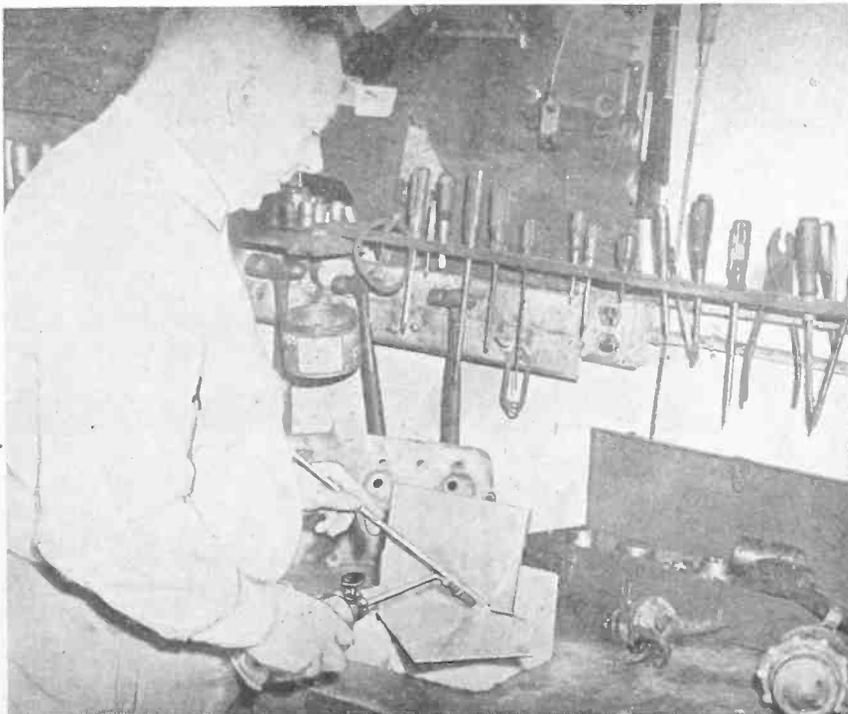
is an outstanding example of the use of Chemalloy to fabricate an aluminum wave guide transition out of four pieces of aluminum and flange. It has been even simpler to use Chemalloy to solder or weld two wave guide sections in position for fabricating a directional coupler. Such work has previously been unheard of except with professional equipment and high competence in this specialized welding field by the welding person. It has been a task that the average radio-electronic technician or engineer felt incompetent to undertake with previously available materials, techniques and equipment.
